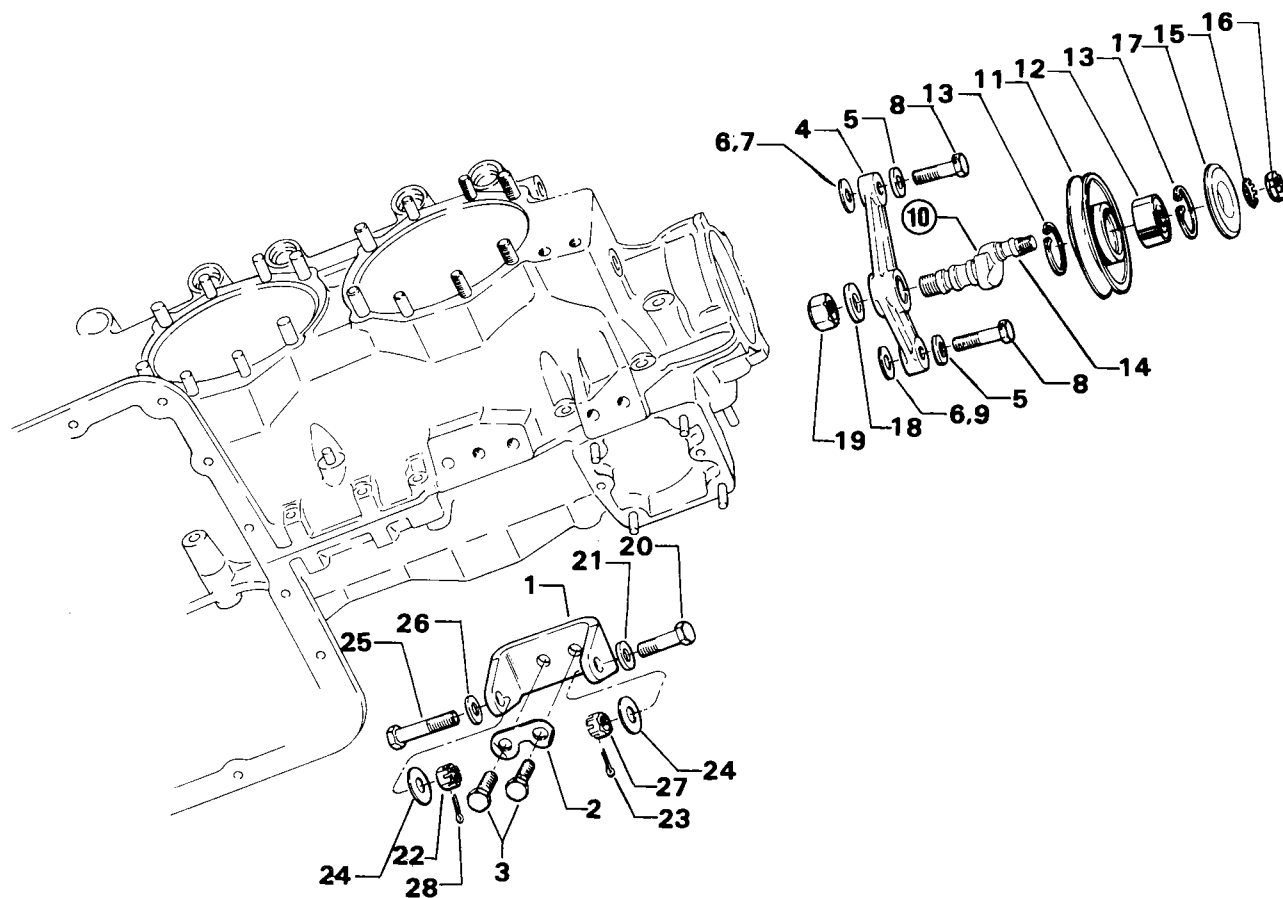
STARTER MOTOR AND ATTACHING PARTS
